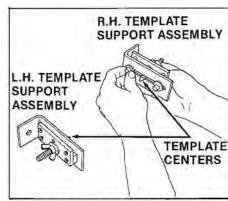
Attach each template support assembly to a bracket, making a left-hand and a right-hand template support assembly.
